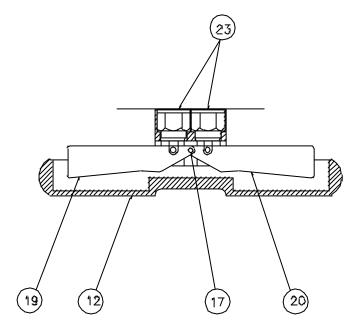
ASSEMBLY DETAILS OF HANDLE AND MAIN VALVES.
